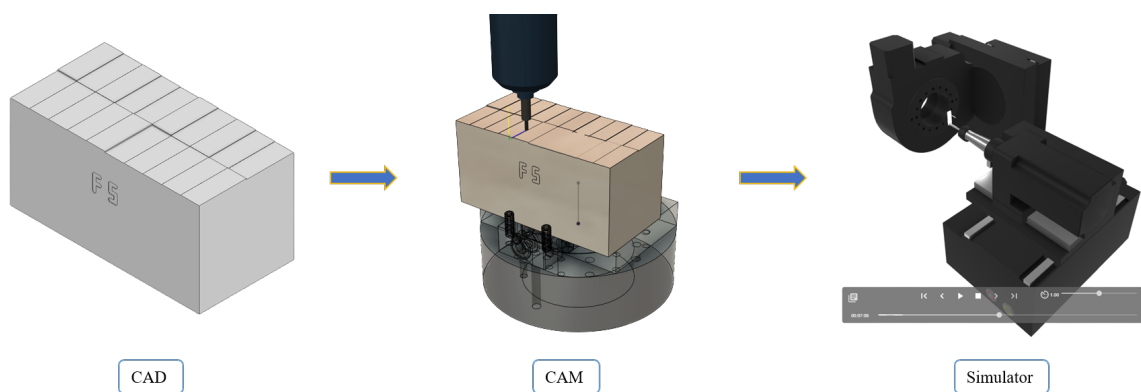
Development phases of a machined piece before actually entering the CNC machine.
